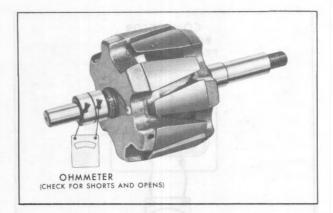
Checking Rotor (With Heavy Duty Generator)
